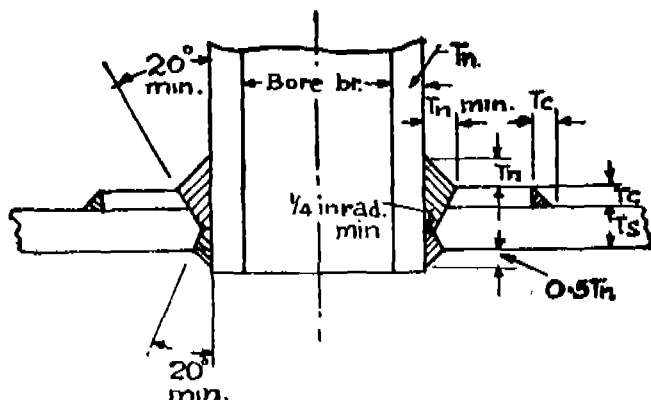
MINIMUM WELD ATTACHMENT FOR STANDPIPES OVER BORE REQUIRING COMPENSATING PLATES.
